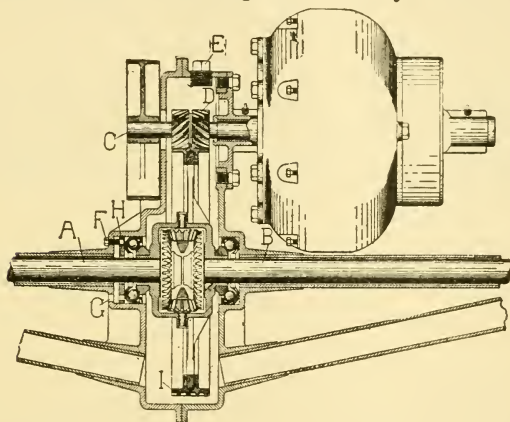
Diagram of a single motor attached to rear axle through 'herringbone' single reducing gears. A, is the left hand section of the divided rear axle; B, the right hand section of the rear axle; C, the brake drum; D, the spiral pinion on the motor shaft driving the worm gear, I, on the differential; E, plug for greasing gears; F, set screw for locking ball race; G, slot for wrench to adjust threaded ring, H, against ball bearings.
